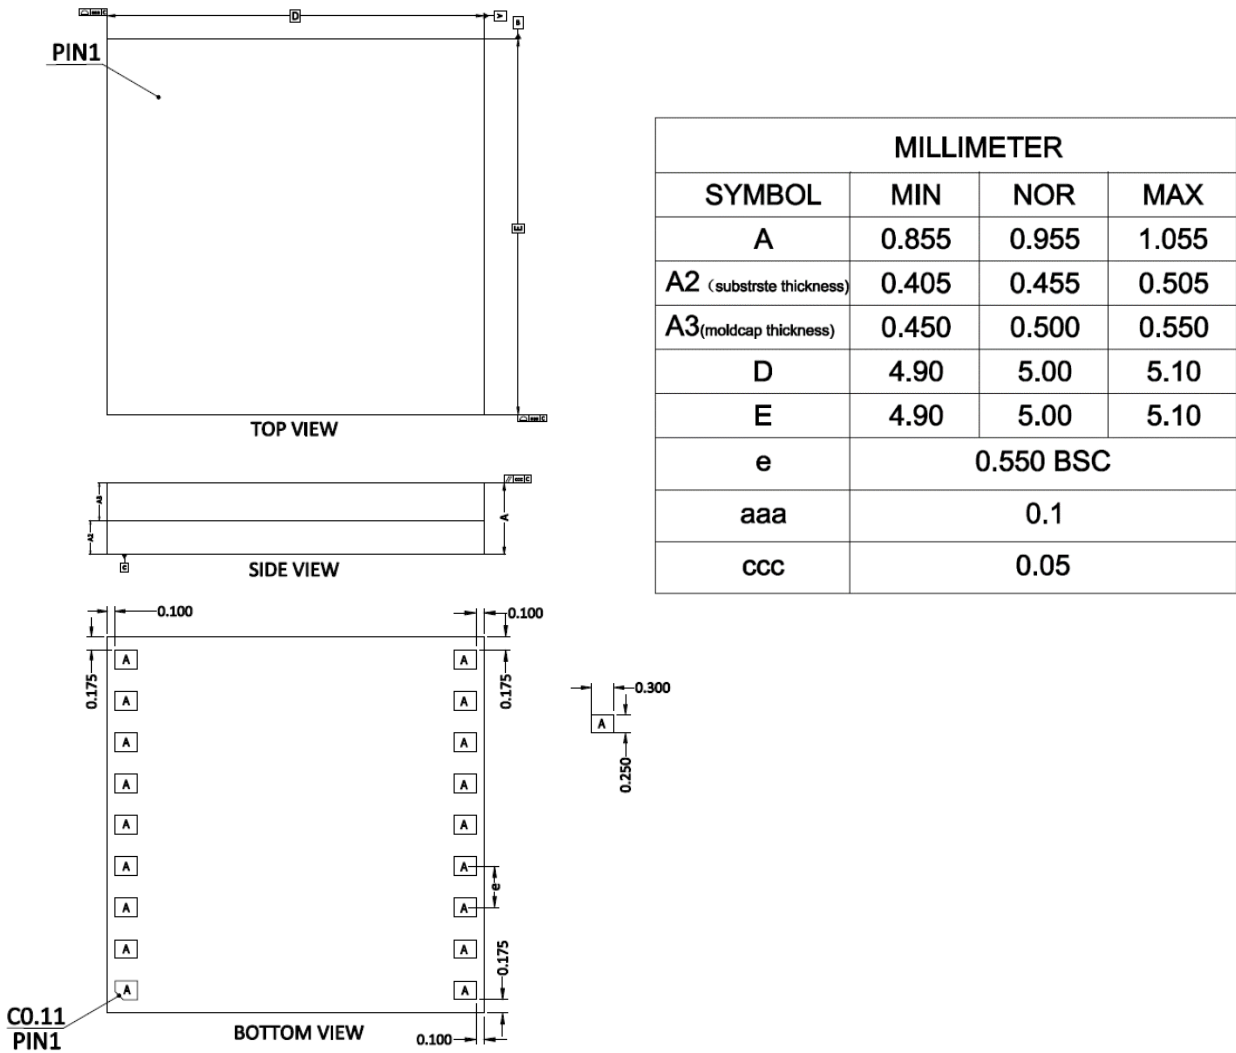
LGA18 Package Shape and Dimension in millimeters
